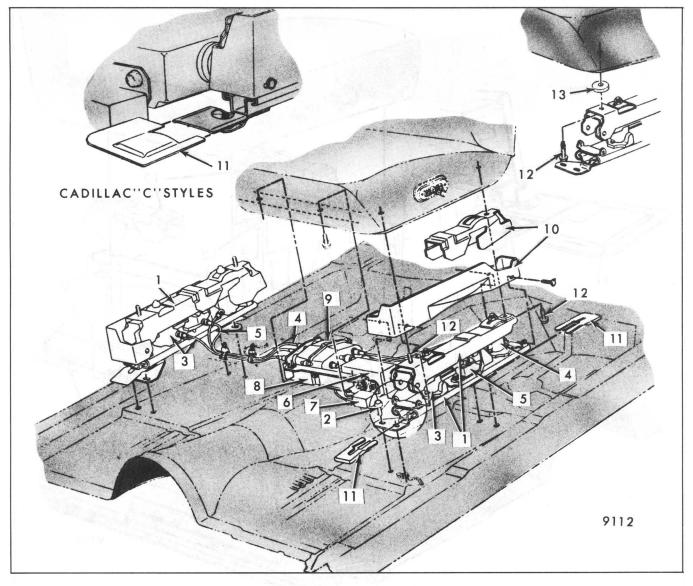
Power Six-Way Full Width Seat and Adjusters ("B-C-E" Body Shown "A" Body Typical)
